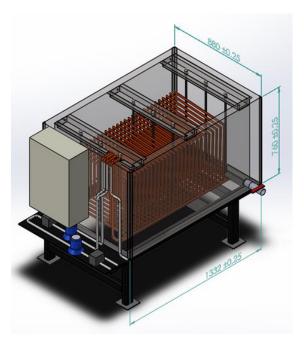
STSs design in Solidworks. The final internal dimensions of the heat storage tank, required to hold the 550 kg of PCM, are shown.
